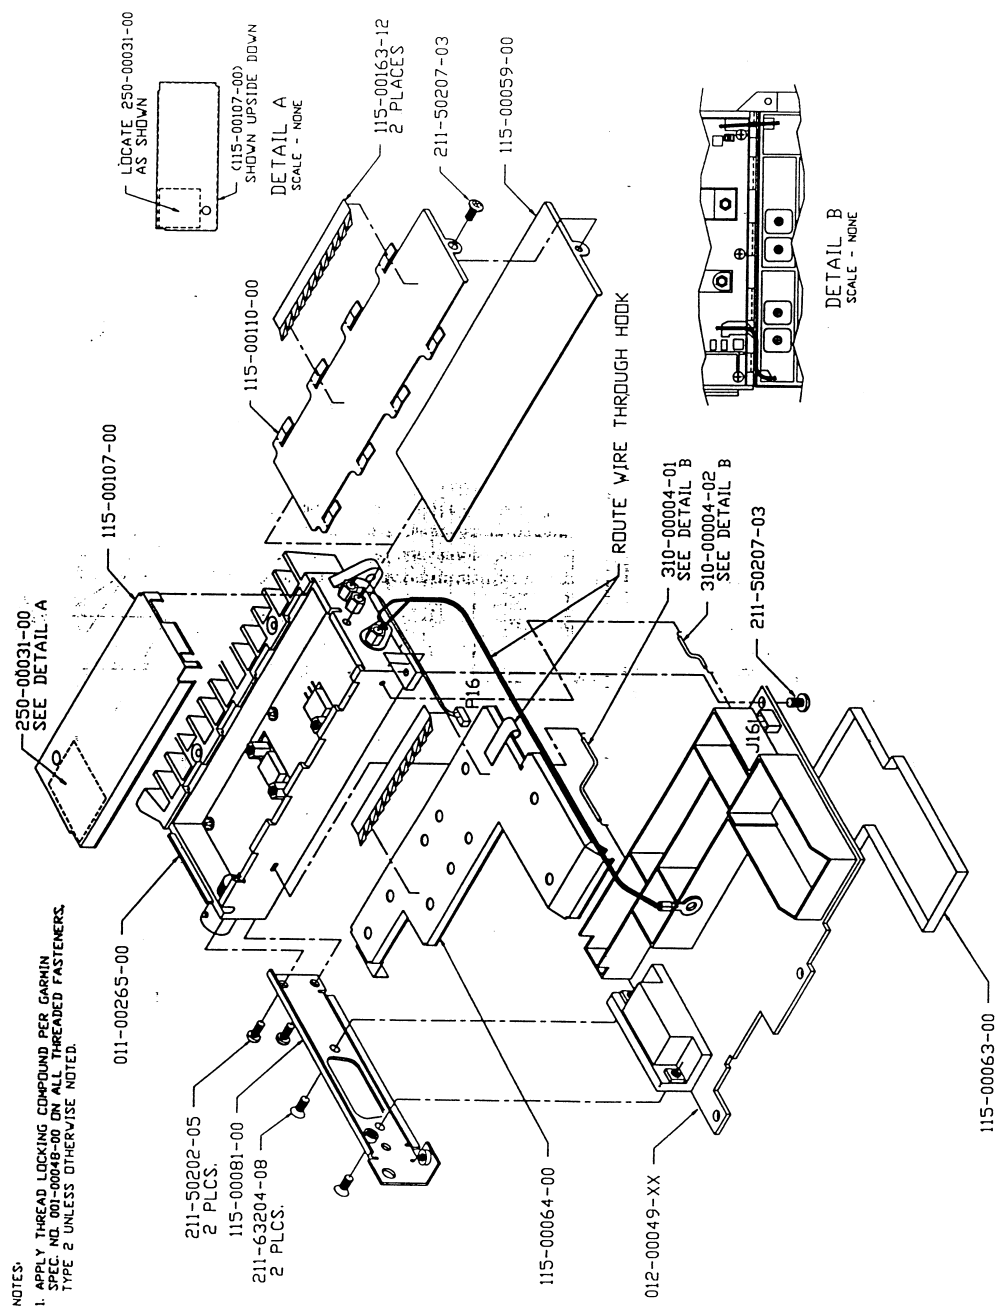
GNC 250/300 Assembly Drawing (View 5)
